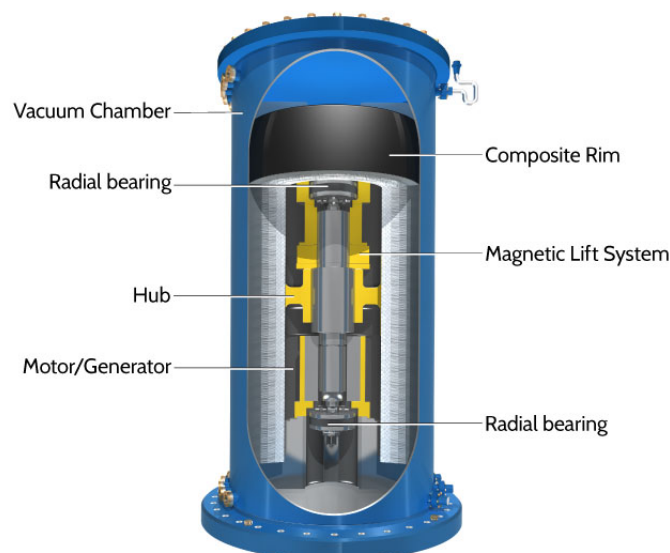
Sectional view of flywheel <sup>iv</sup>
